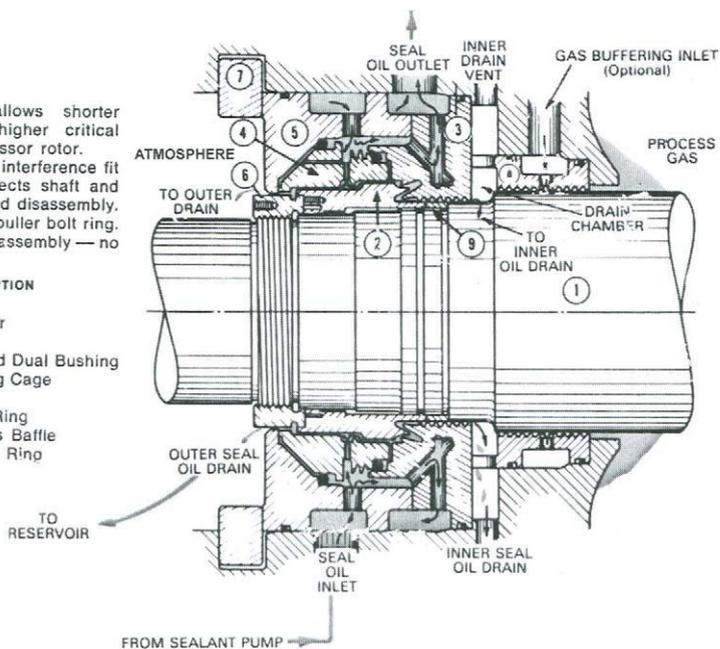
Turbo-compressor 'trapped bushing seal' (Courtesy of A.C. Compressor Corp.)
